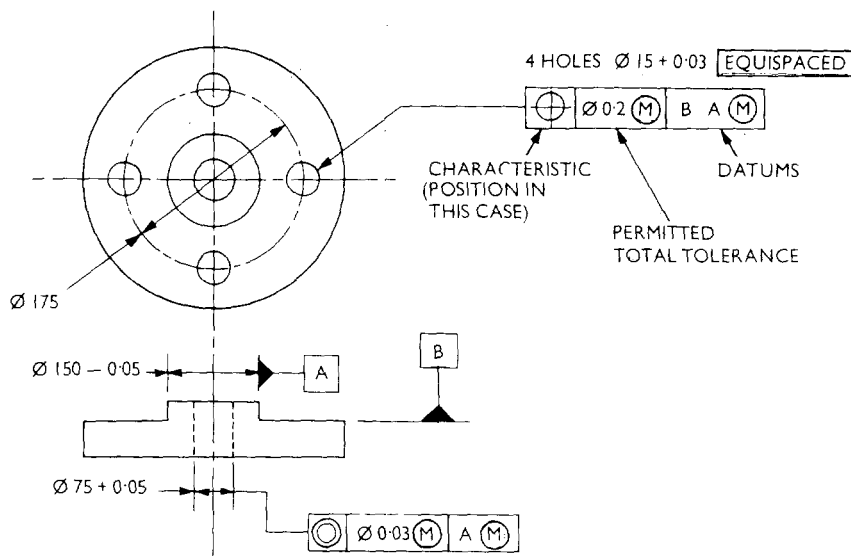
EXAMPLE TOLERANCED DRAWING
